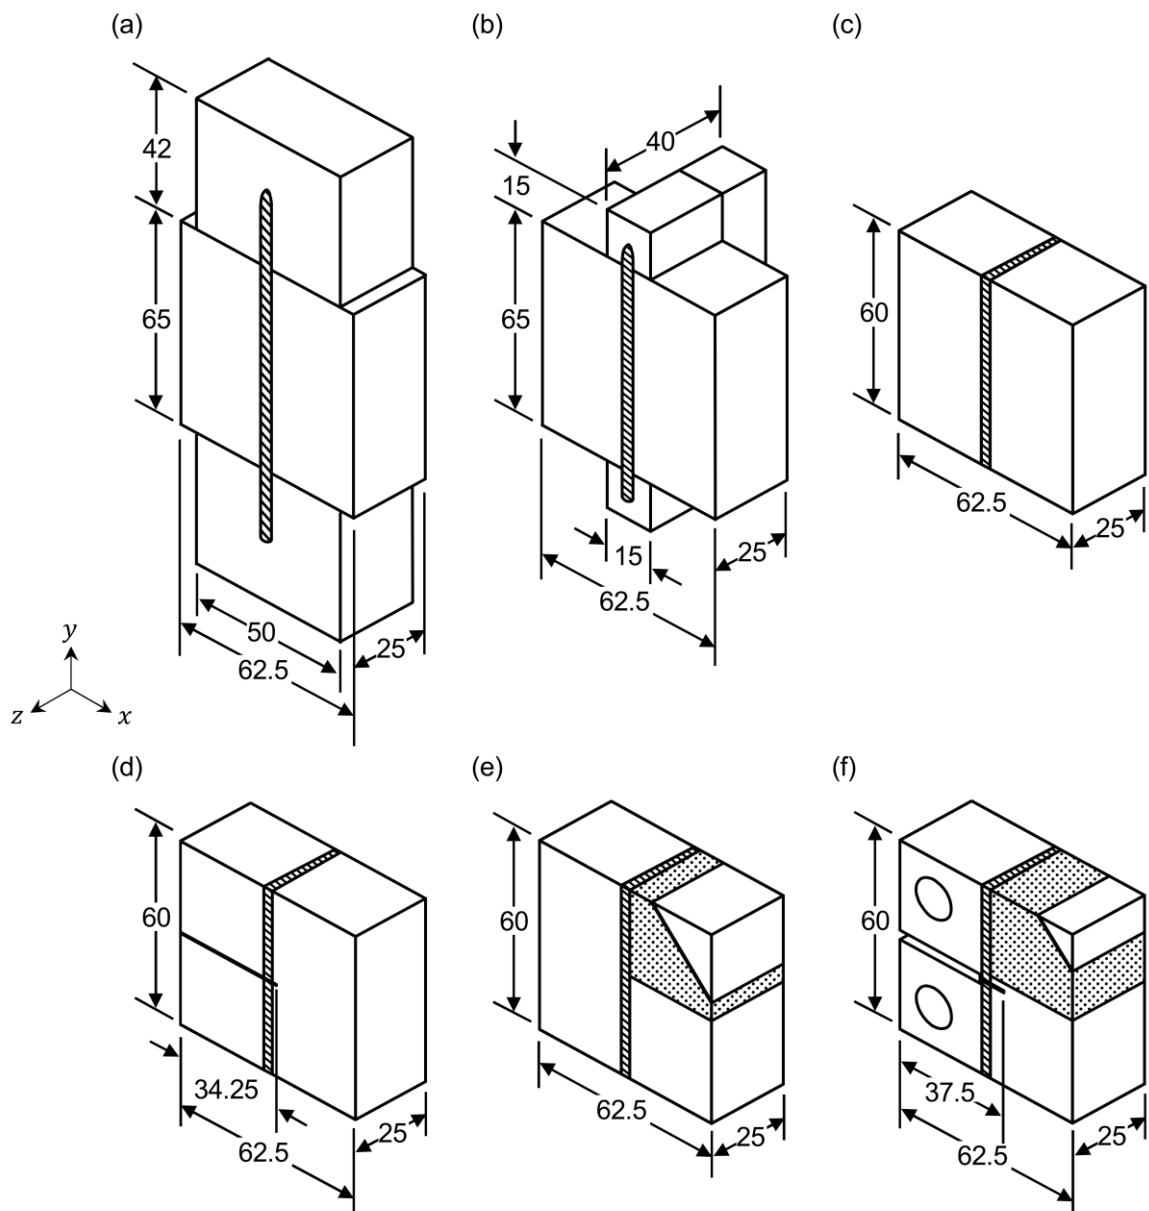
(a) EBW1 in the as-welded configuration, (b) EBW3, EBW4 and EBW5 in the as-welded configuration, (c) EBW3, EBW4 and EBW5 machined into a C(T) blank, (d) EBW3, EBW4 and EBW5 with an EDM notch, (e) EB1 containing a MMA weld in a C(T) blank configuration and (f) a C(T) specimen machined from EB2 containing a MMA weld. The EB and MMA welds are shown by striped and dotted patterns respectively.
